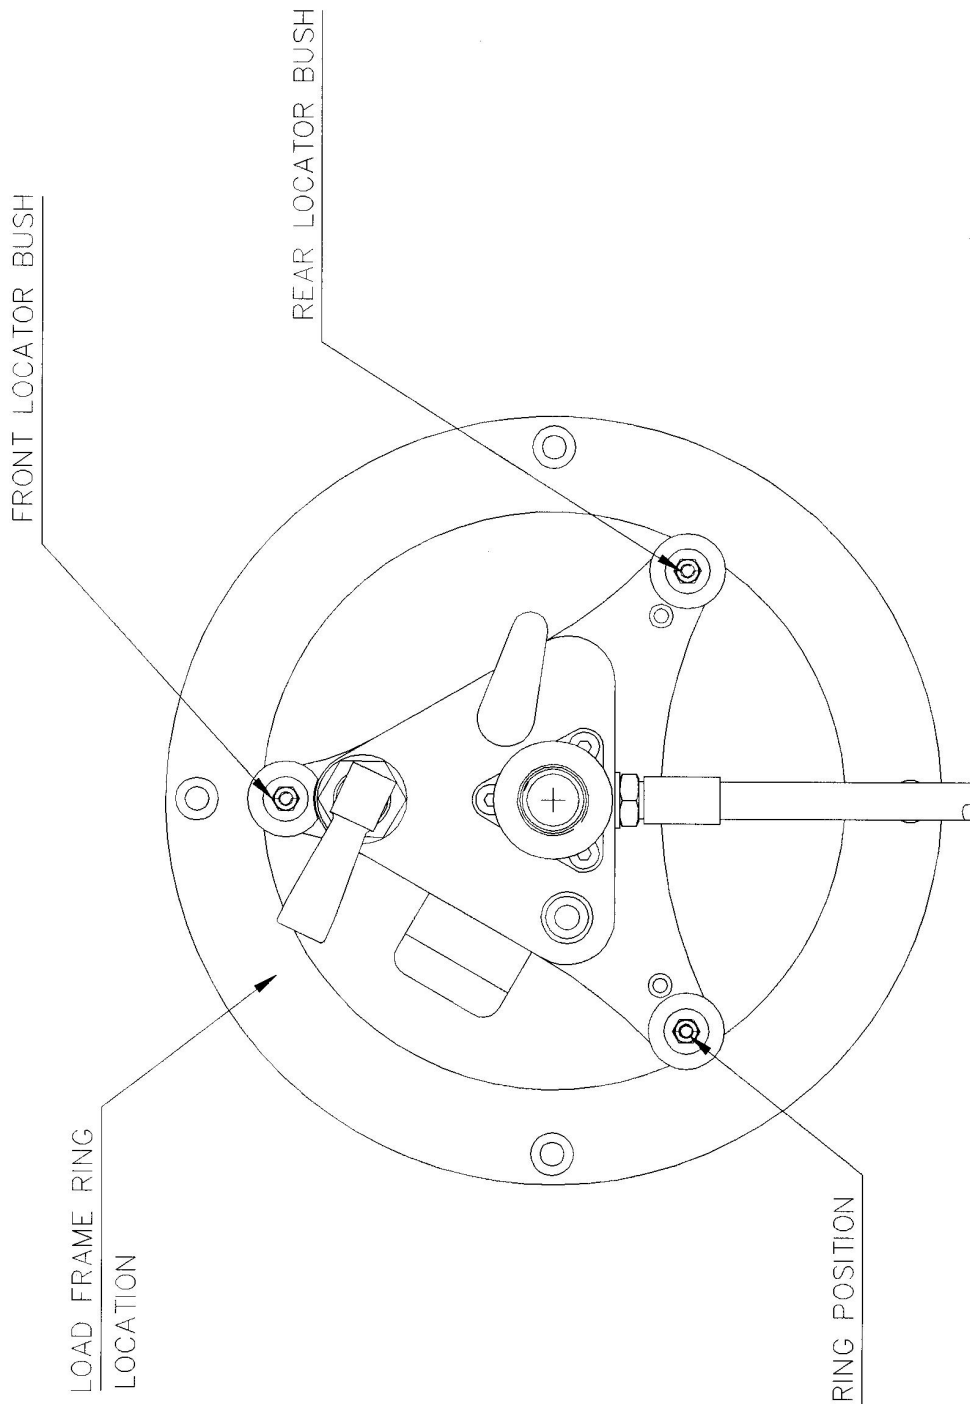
ARRANGEMENT OF LOCATOR BUSHES
